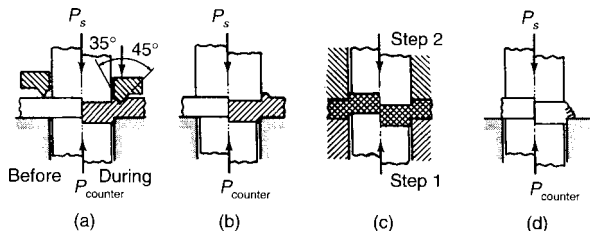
Parts with finished edges can be produced by (a) precision blanking, (b) negative-clearance blanking, (c) counterblanking, (d) shaving a previously sheared part. (J. Schey, "Introduction to Manufacturing Processes," McGraw-Hill, 1987.)
